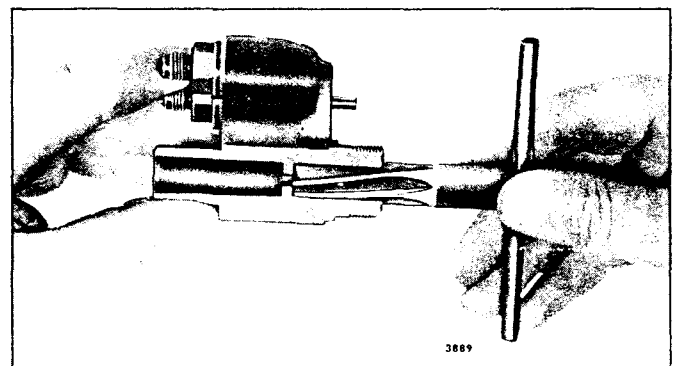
Cleaning Injector Body Ring with Tool J 21089
